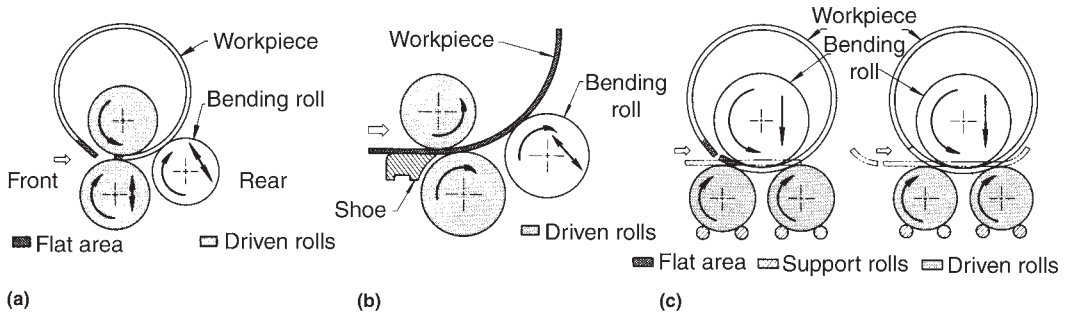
End views of different setups for three-roll forming. (a) Conventional pinch-type machine (note large flat area on the leading end and smaller flat end on trailing end). (b) Shoe-shaped machine with two powered rolls. (c) and (d) Arrangement of rolls in a pyramid-type machine. Note flat leading and trailing ends shown in (c) are minimized in (d) by prebending. Source: ASM 1988c
